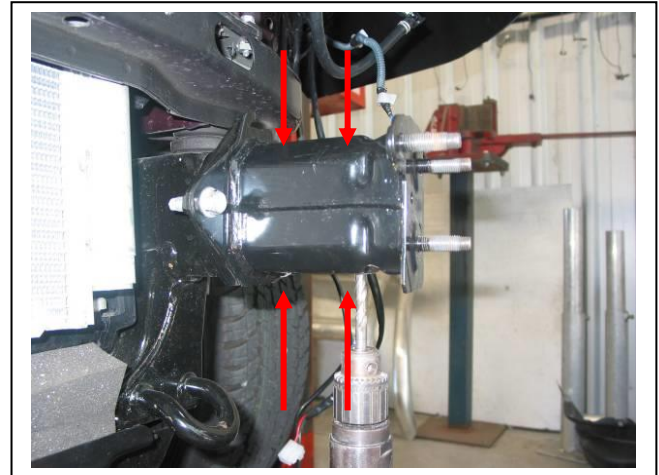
Drill holes to 10mm (3/8). Drill or die grind top to 18mm.
